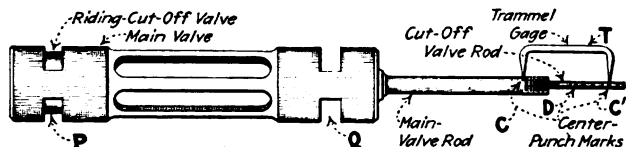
Center-punch marks and gage for adjusting the cut-off-valve stem and the cut-off valve.
